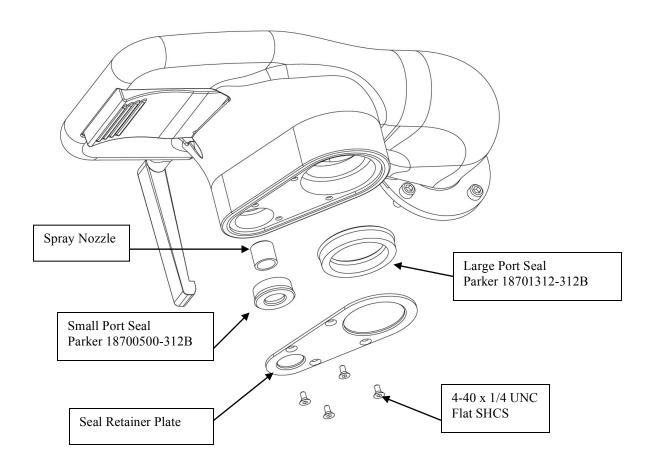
Exploded View Of Seals In Quick-Drain QF Drainhead
